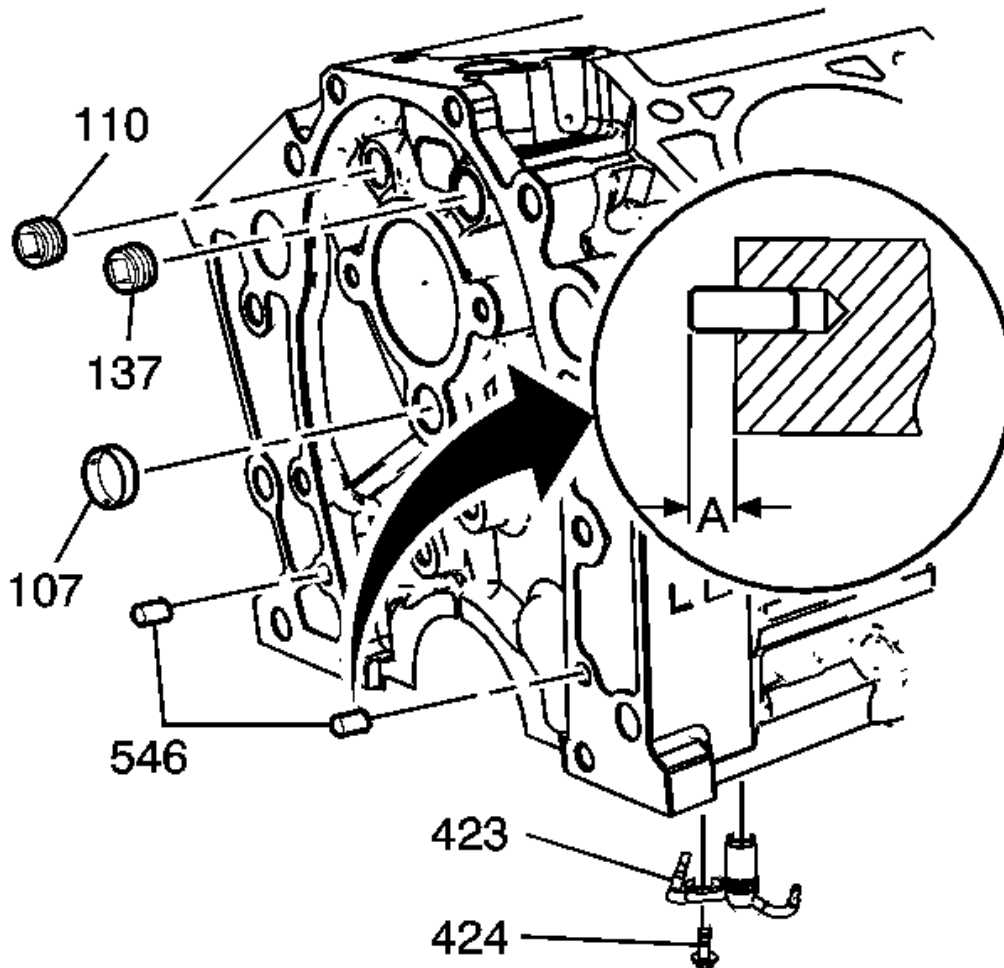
View Of Front Oil Gallery Plugs, Engine Front Cover Locating Pins & Piston Oil Nozzle
